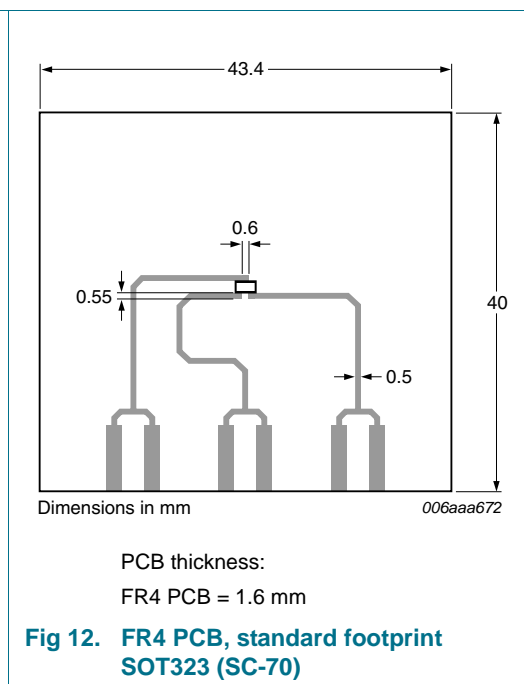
FR4 PCB, standard footprint SOT323 (SC-70)
